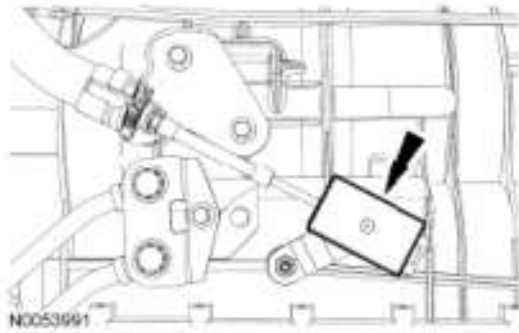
Identifying Starter Motor Electrical Connectors Bolts
